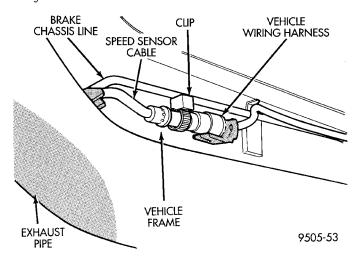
Rear Speed Sensor Connection To Vehicle Wiring Harness
